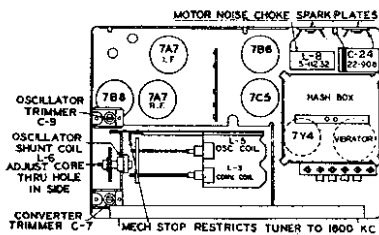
Bottom view of Chassis 6D80, 6D80E, 6D90, and 6D90E.
